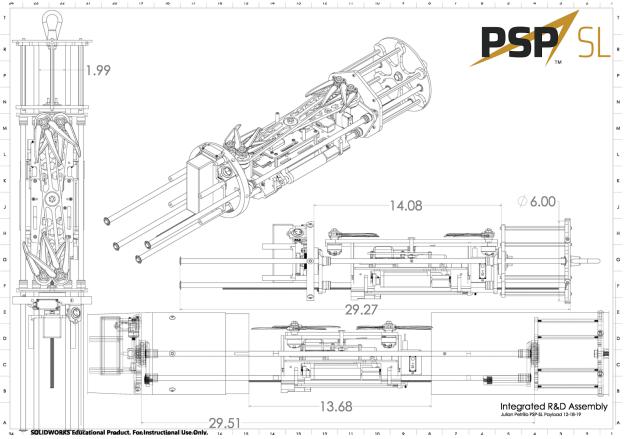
Integrated Payload R&D System Dimensional Drawing
